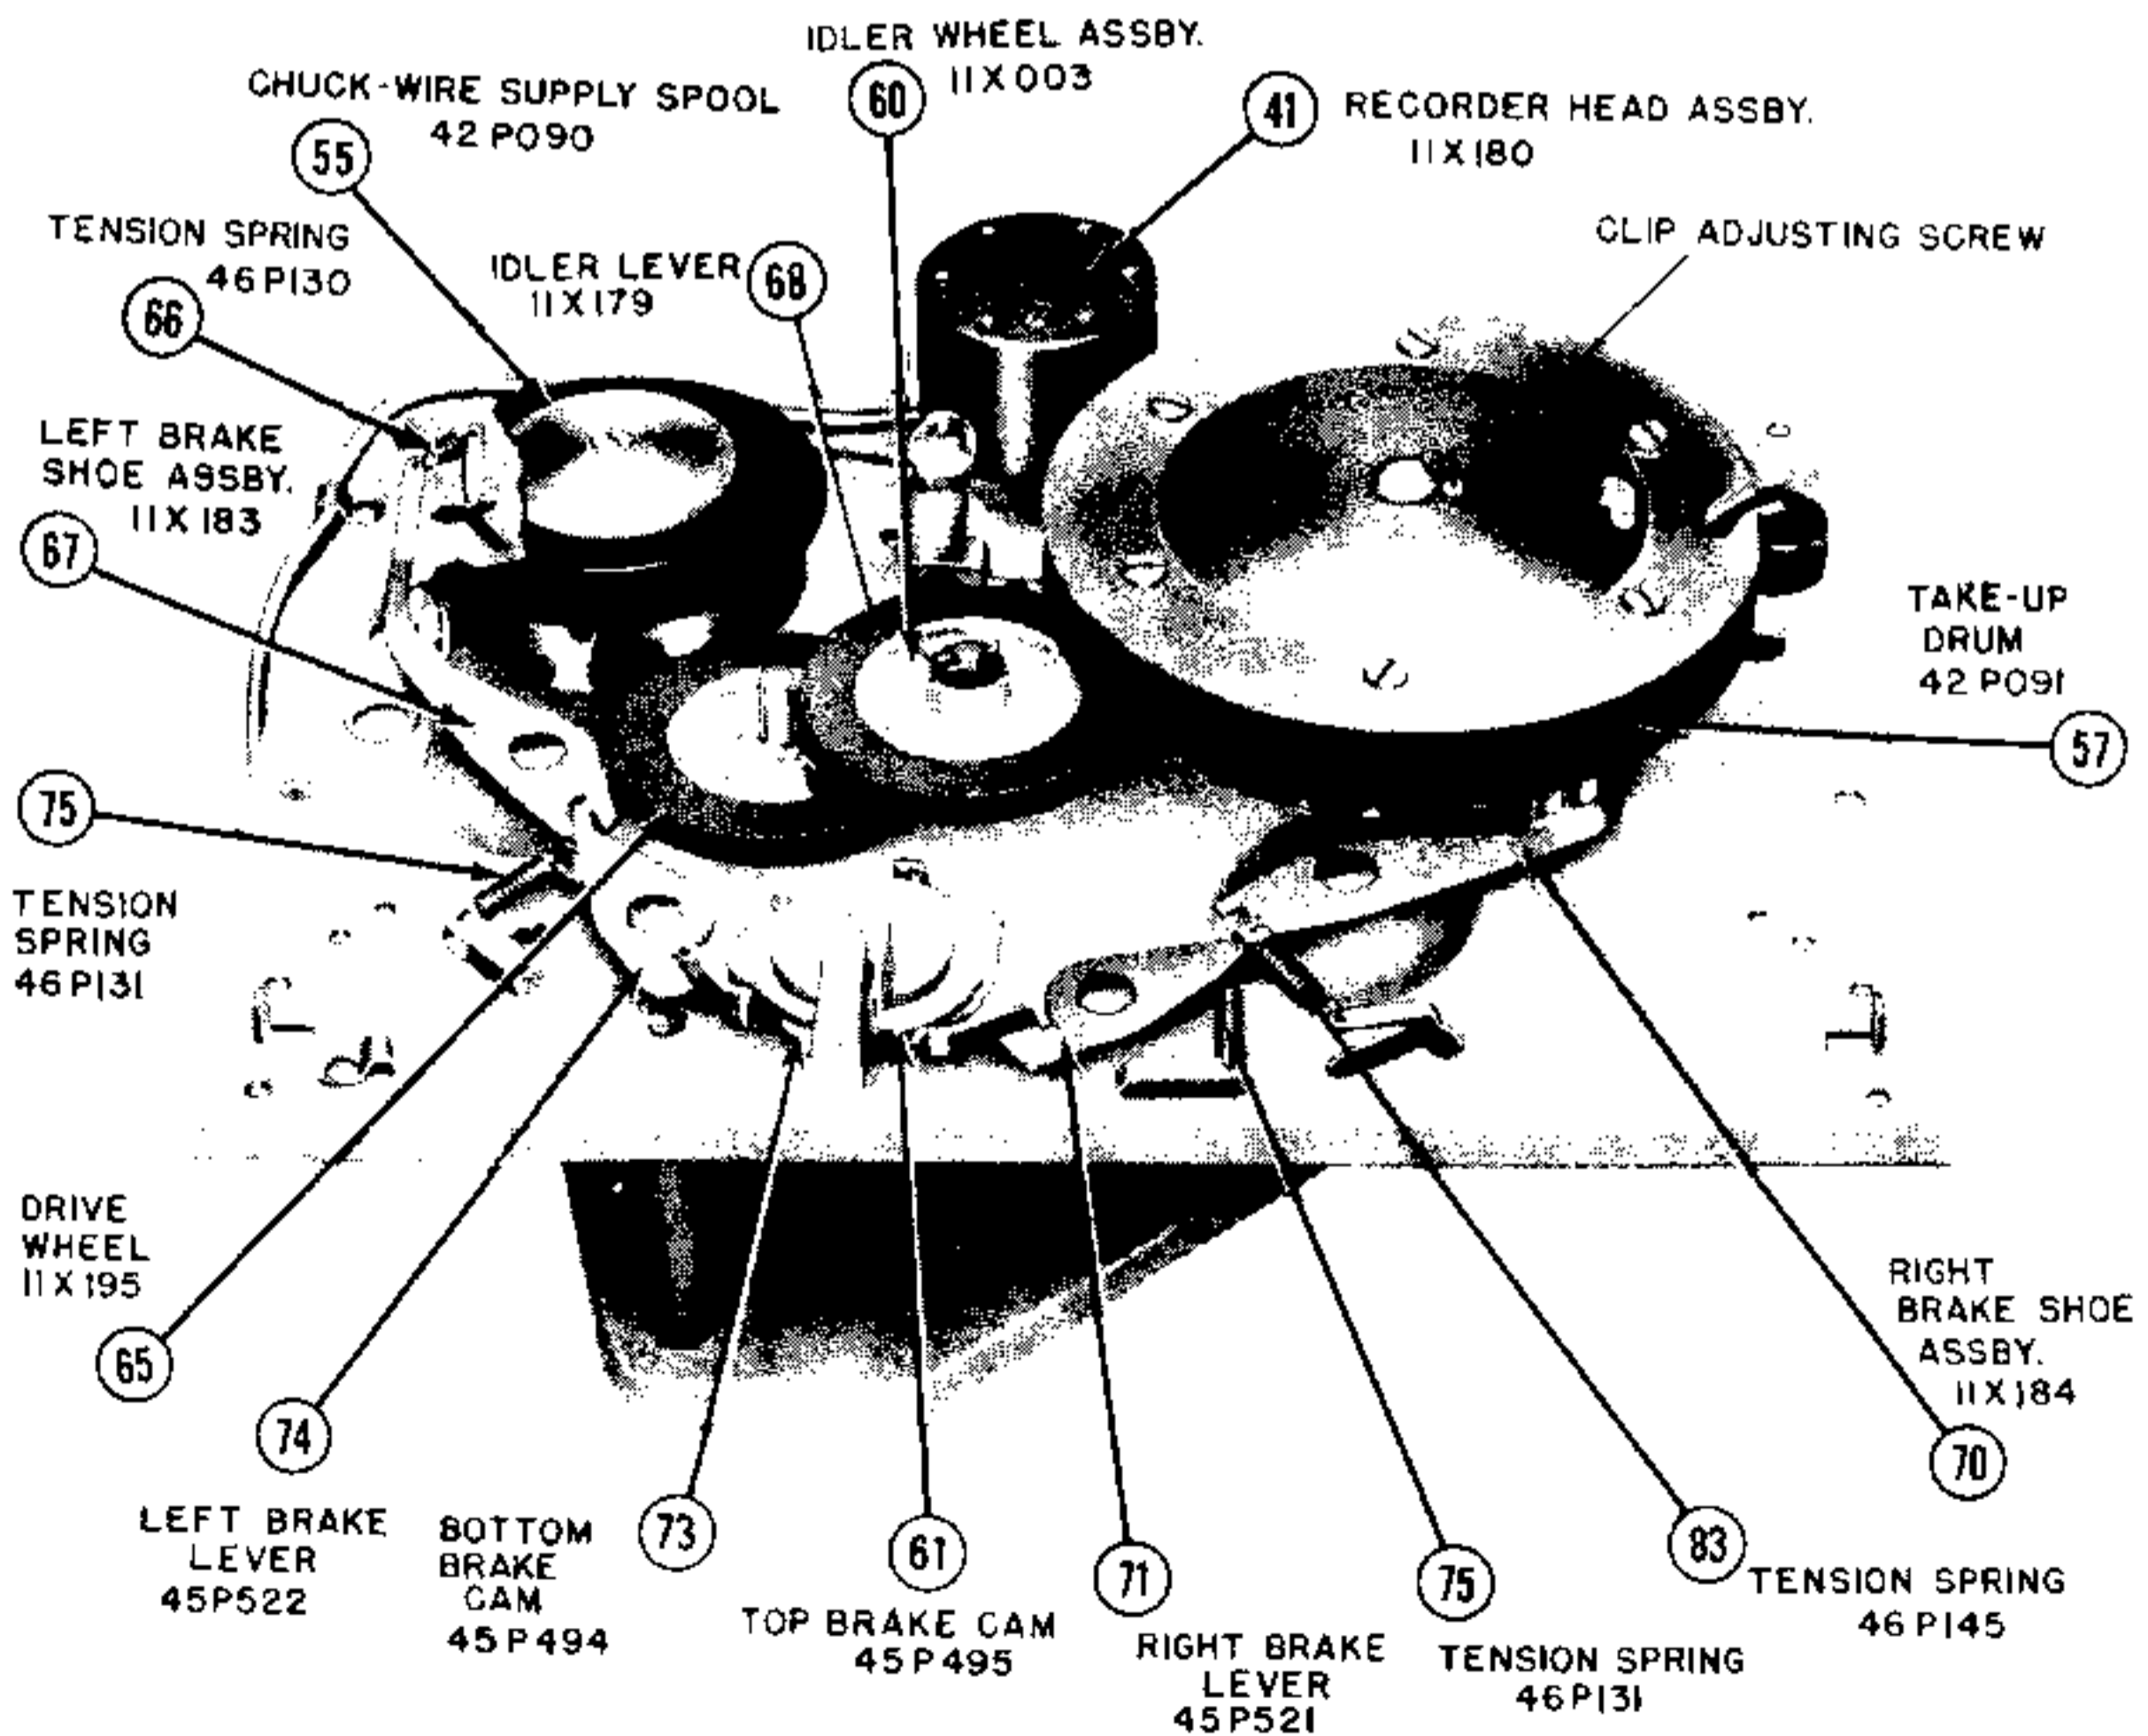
TOP VIEW — DRIVE MECHANISM (Less Cover Plate)
